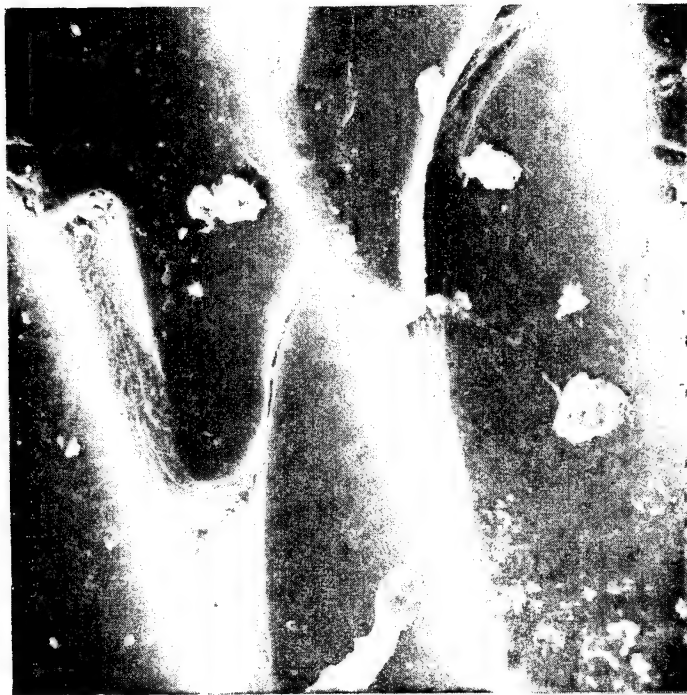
Typical View of Fracture Surface "A" in Adhesive Bonded Joint Specimen
